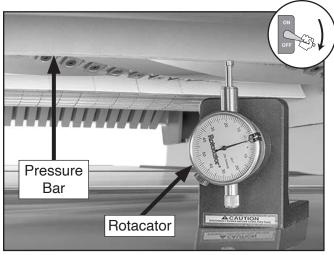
Rotacator placed underneath pressure bar (shown from rear of machine).
